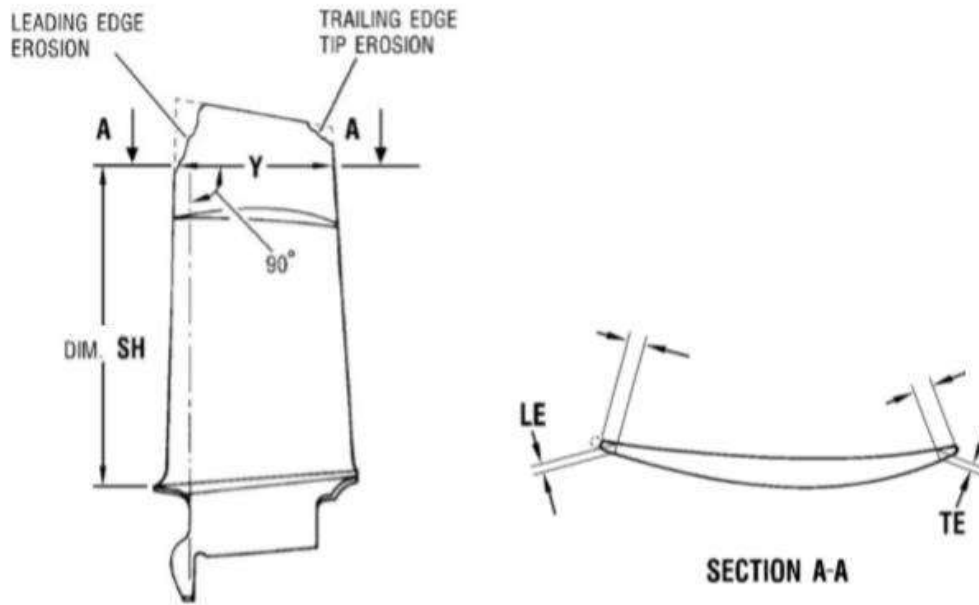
Dimensional inspection specifications for stage 1 blades. – Appendix III
